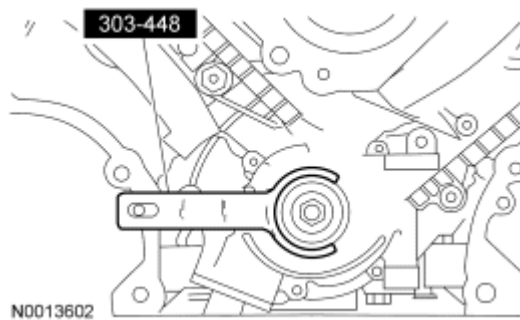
Positioning Crankshaft With Special Tool (303-448)
